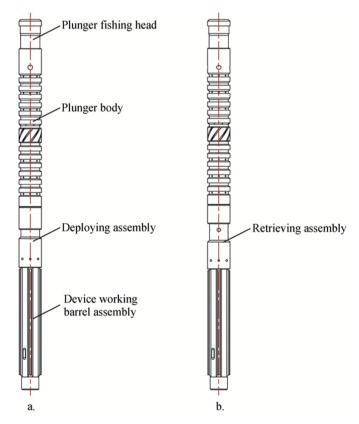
The plunger with a deploying assembly (a) and the plunger with a retrieving assembly (b).
